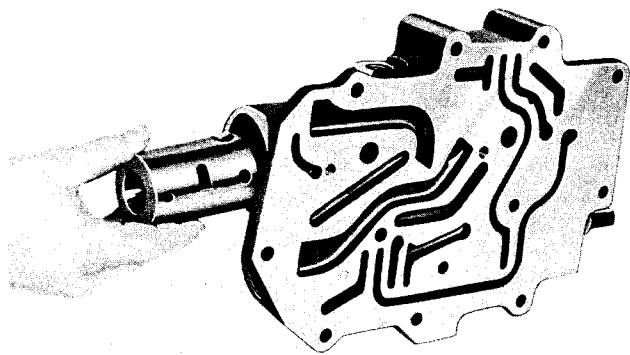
Removing or installing spring and ball from range selector valve body
